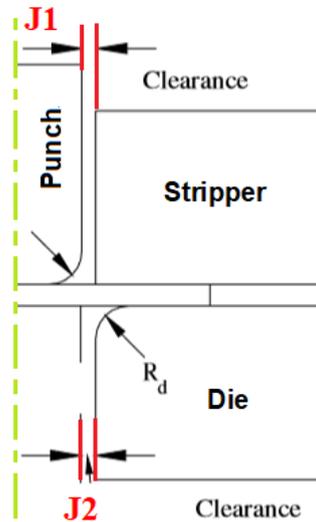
Geometry of punch, die, stripper, metal sheet and clearance.
